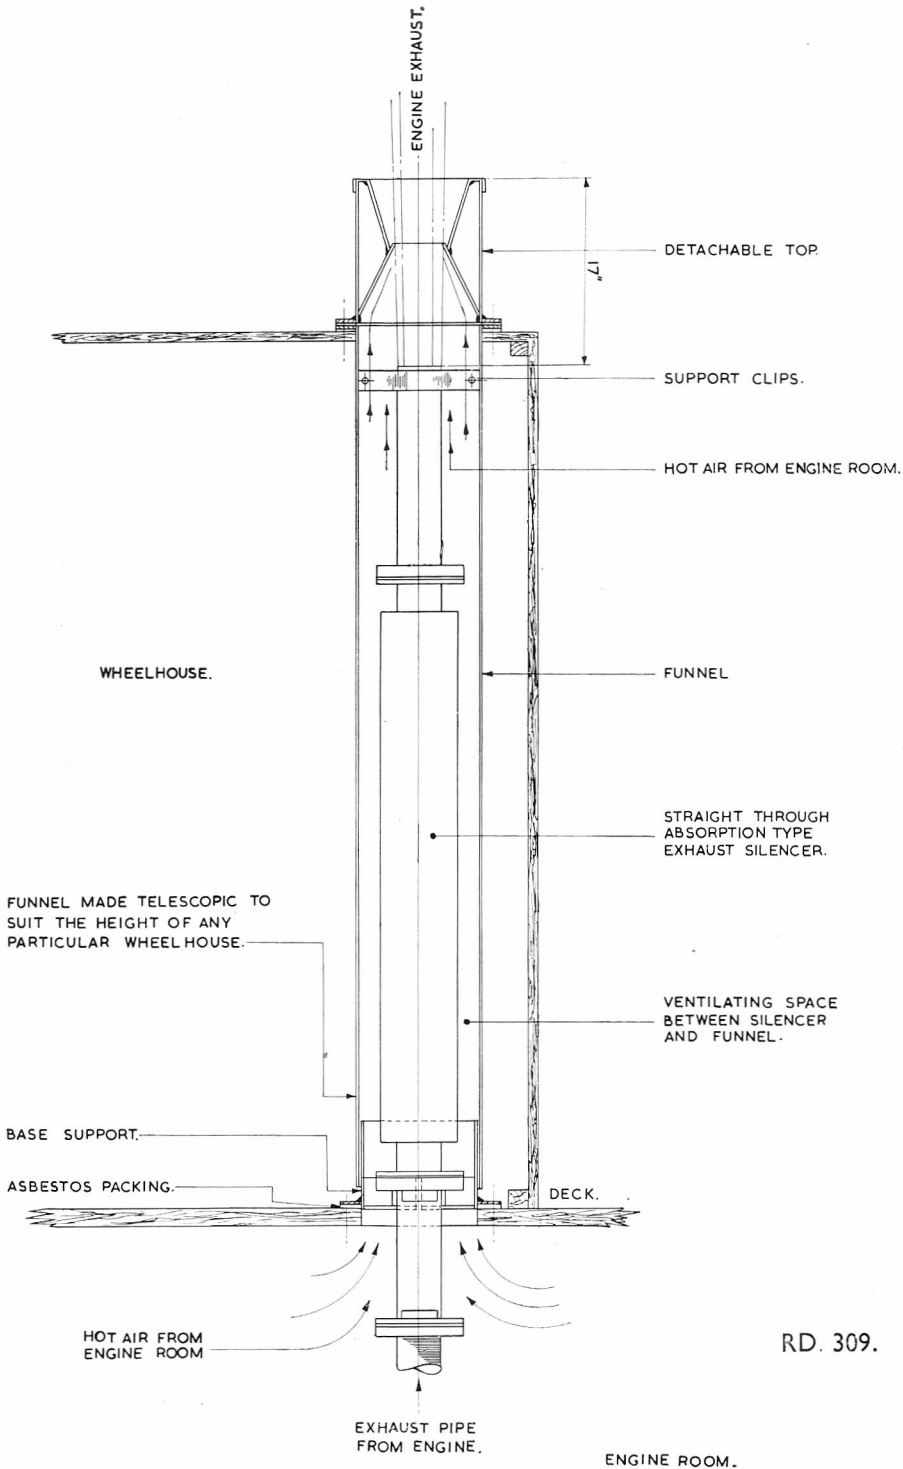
Installation of Engine Room Ventilating Funnel and Silencer (Inside Deck House Type)
